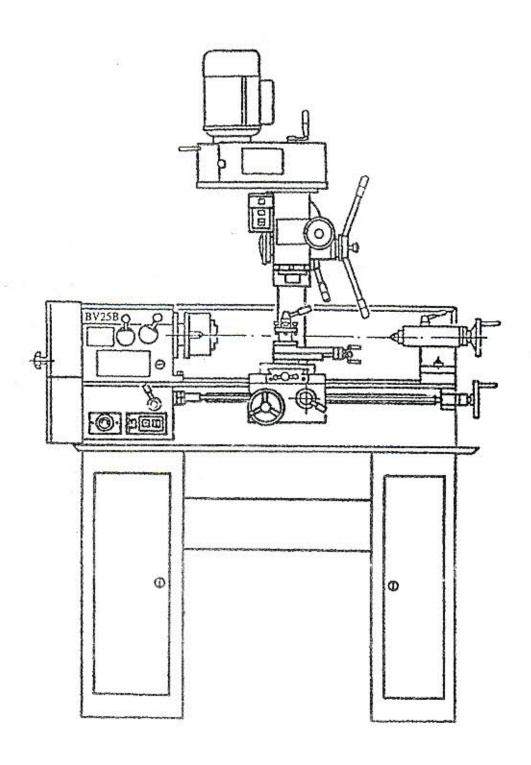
4 OUTLINE DRAWING OF BV25B - 4 BASE FRAME
